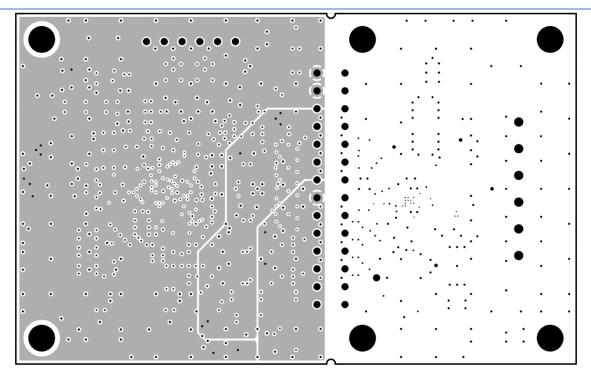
Layout view – Layer 3 - Internal - Power (not to scale)
